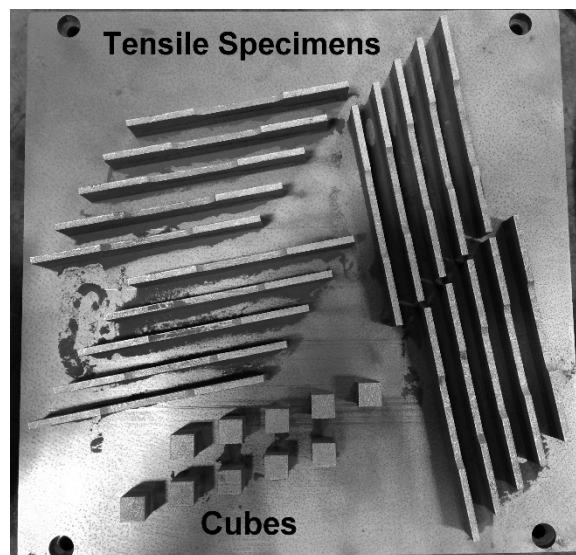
Photograph showing a build plate with flat tensile samples (YZ) and small cubes
